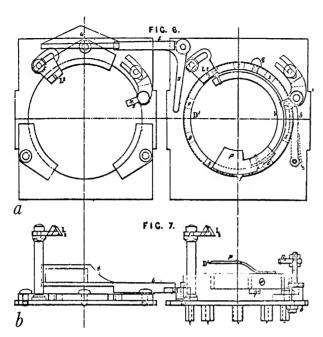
Final patent specifications, carry mechanism: a, shelf surrounding number wheel, top plan; b, side elevation.
